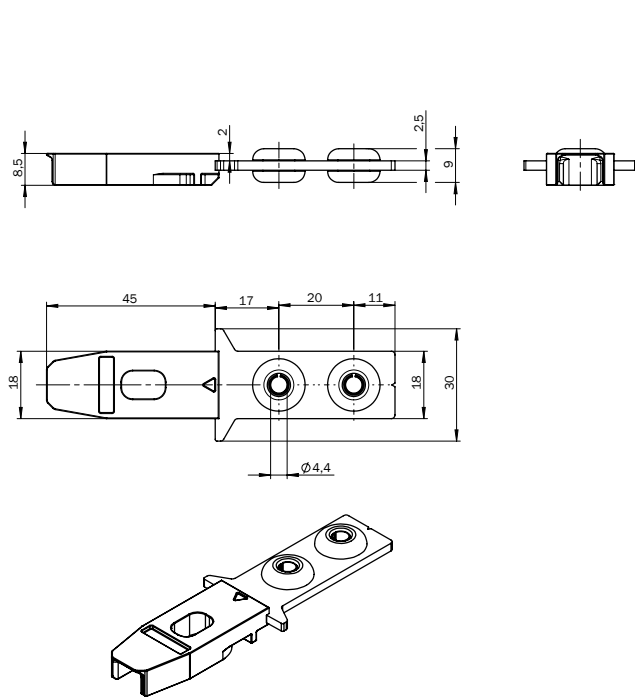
Dimensional drawing of TR110-XAS straight actuator (mm)
